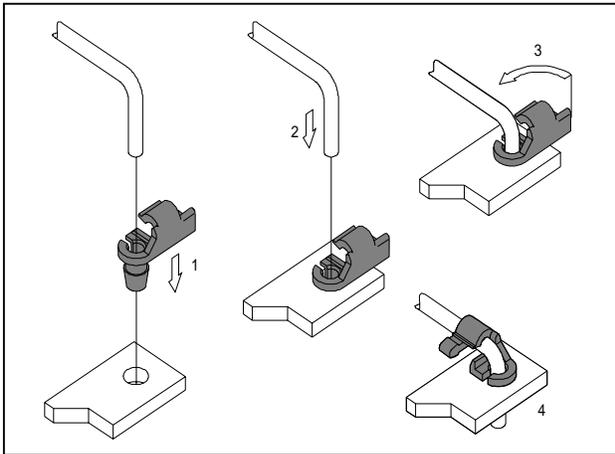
Snap-on rod end operation. Removal is reverse to installation
